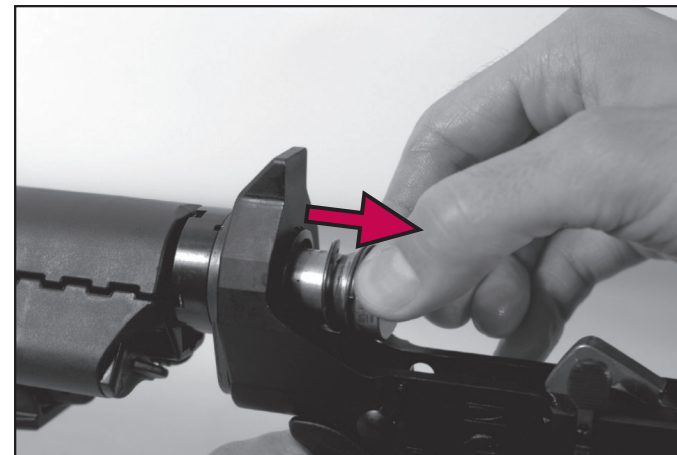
D: Remove Recoil Buffer and Recoil Spring
